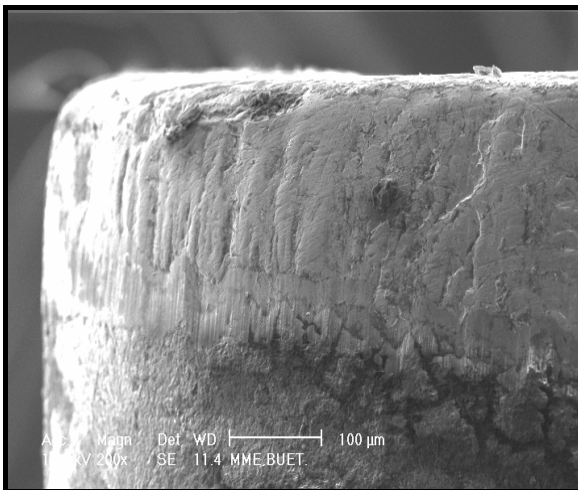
SEM view of principal flank wear of the worn out insert after machining 50 minutes under cryogenic machining conditions.
